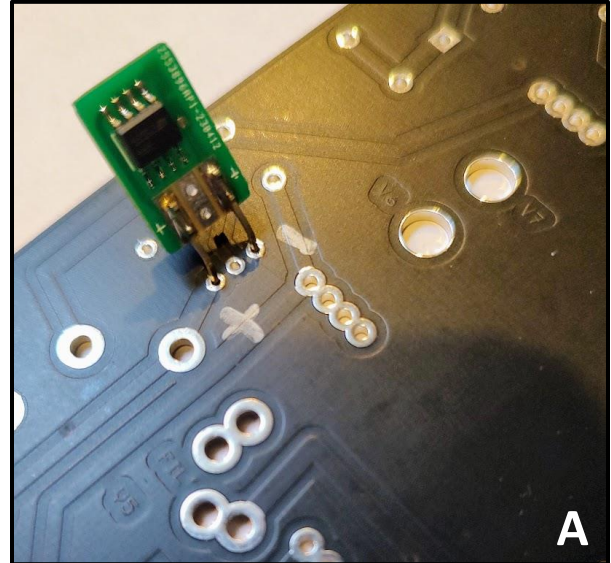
Photo A: Underside view of Dyna-70 PCB; viewed from underside, this is the left side SMT-334 (Right side when installed face-up on amplifier). Note polarity markings on PCB and the SMT-334. The tube sockets are to the bottom left corner in this photo.
